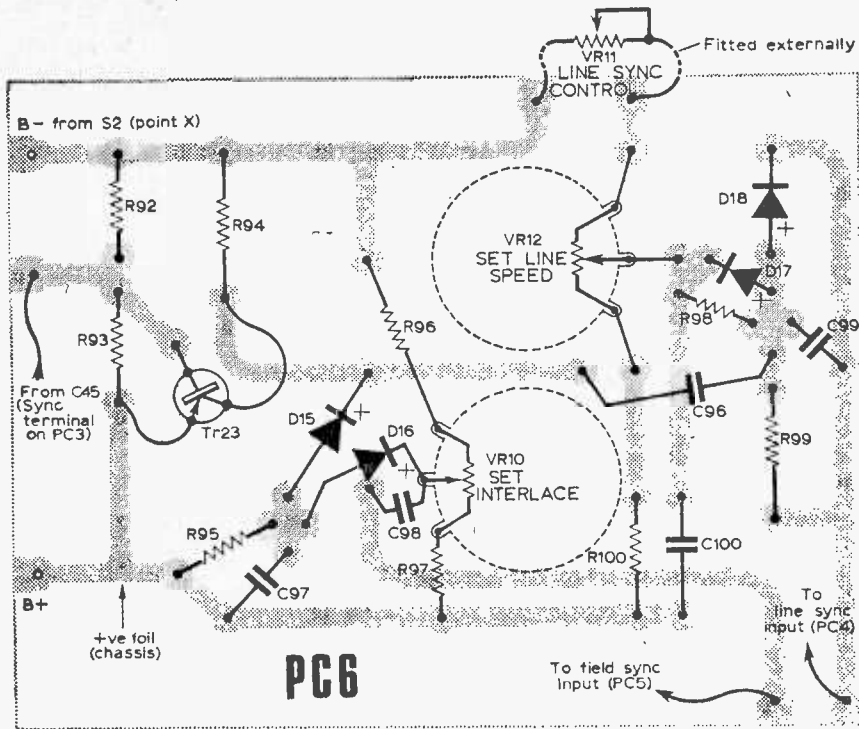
Sync Control Unit printed circuit board PC6 (full size)—copper parts are shown shaded.
